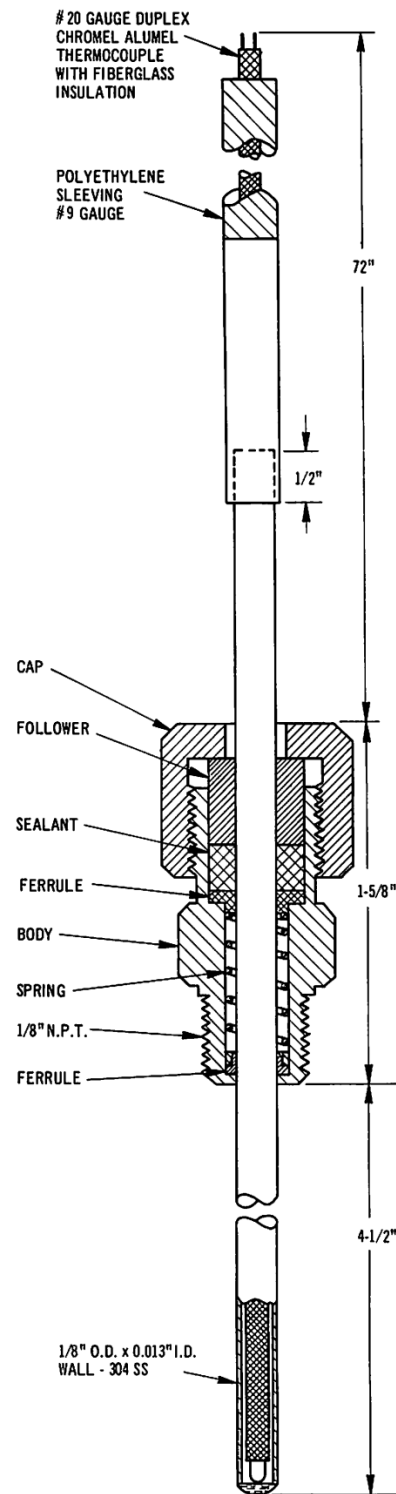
Figure 6.9-2 Pipe Surface Thermocouple Assembly [Vol. II, Chapter 6, p.6.9-5]
